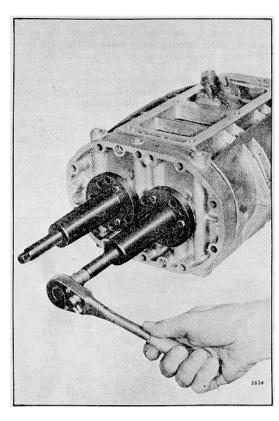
Removing Blower End Plate and Bearings from Housing and Rotors with Tool J 6270-31
